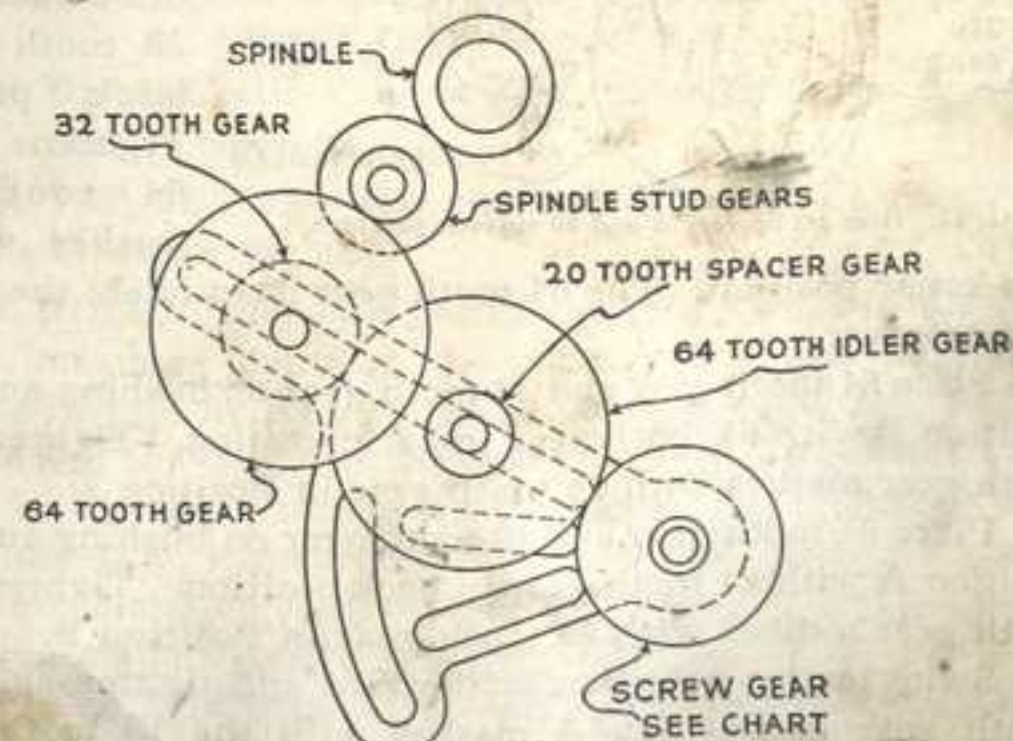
Gear set-up for 36 through 64 threads per inch (see page 10).
